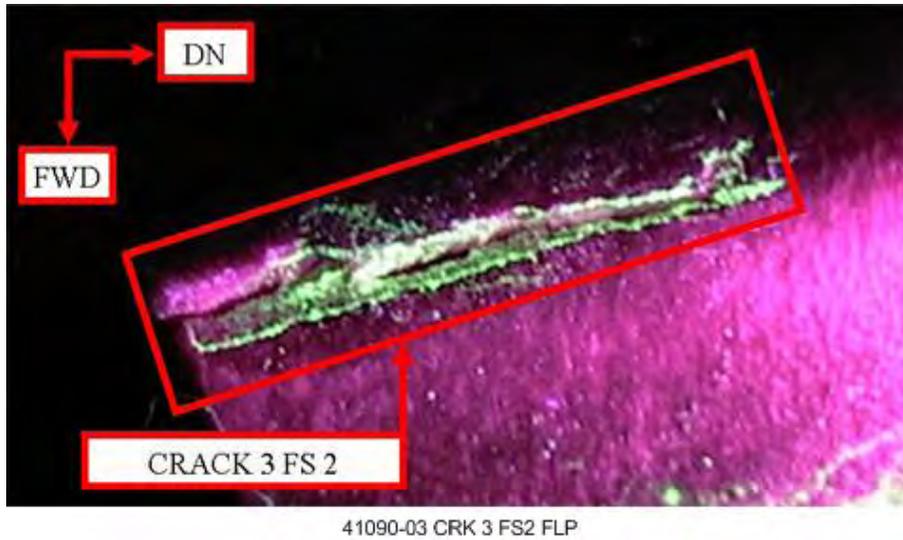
Fluorescent Liquid Penetrant Indication of Crack 3 on the Fuselage Web-Beam Assembly Lower Forward Frame Right Side FS 2
